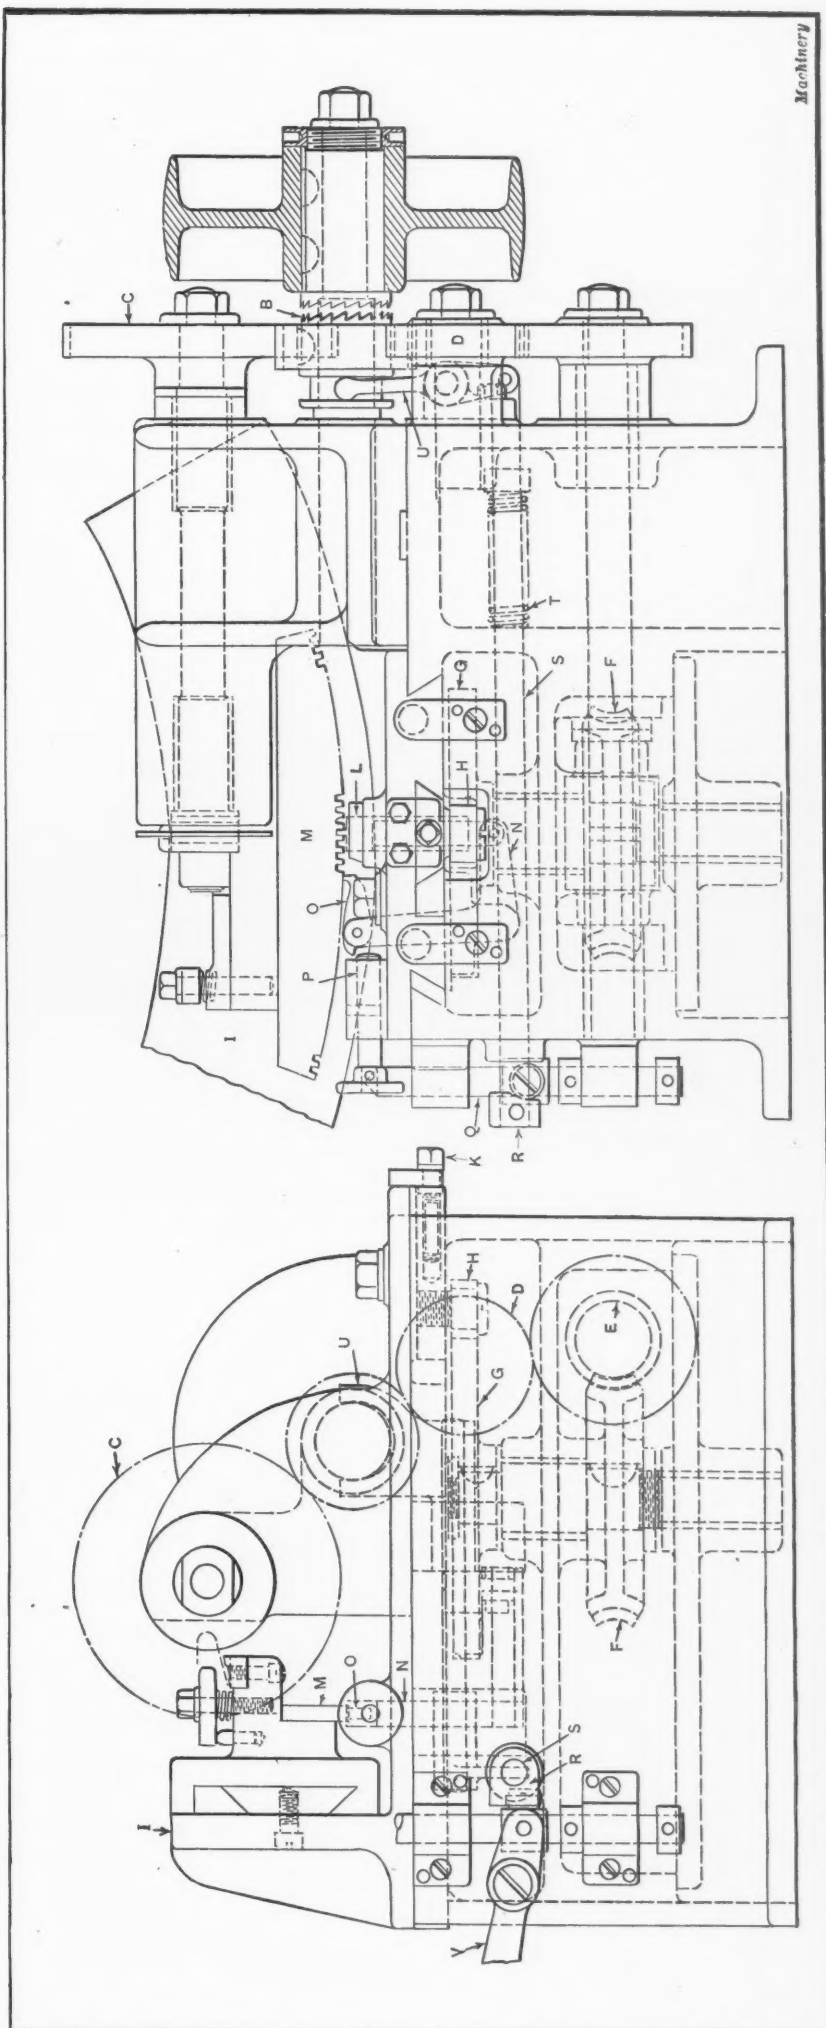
Assembly Views of the Construction of the Sub-lever Segment Slotting Machine
